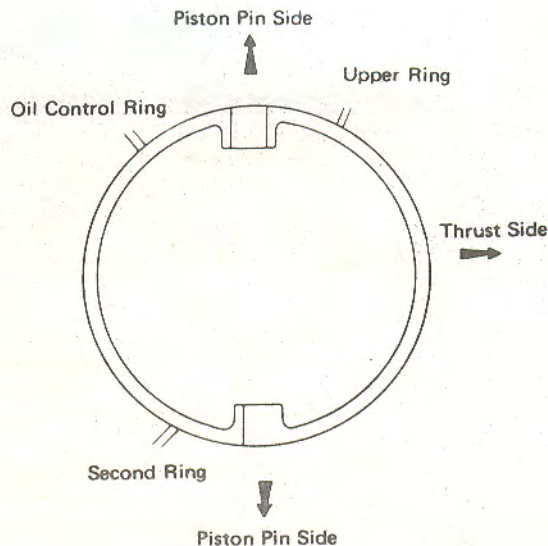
The arrangement of the piston ring end gaps on the piston in relation to the thrust side and the piston pin fitting direction.
